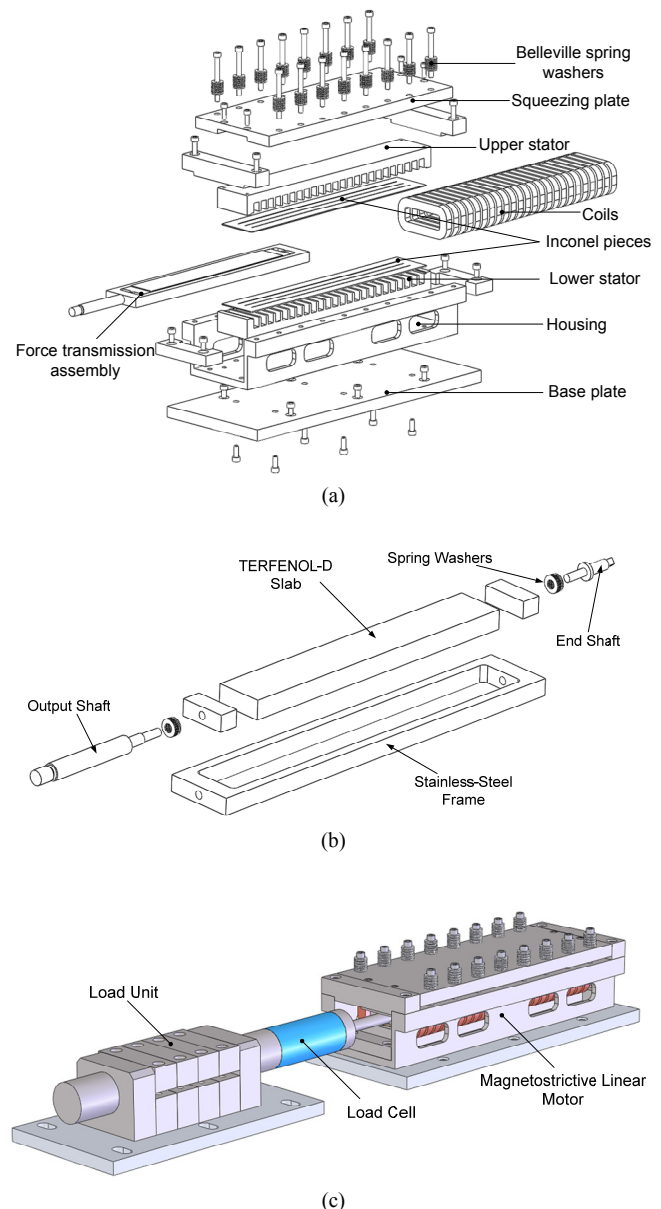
(a) Exploded view of linear magnetostrictive motor. (b) Exploded view of force transmission assembly. (c) Experiment setup.
